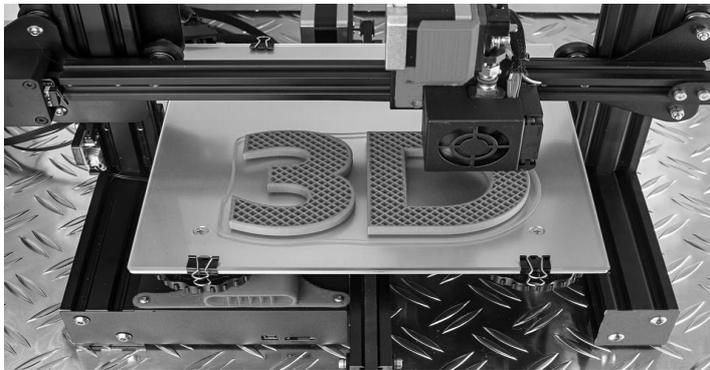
3D Printing Mechanism (source: line.17qq.com)
